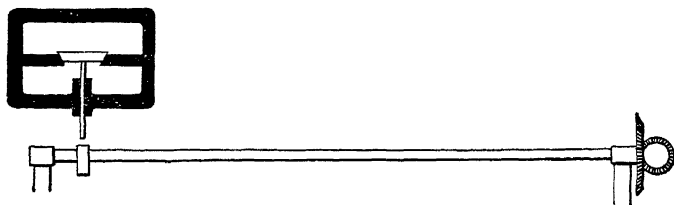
VALVES OPERATED BY BEVEL GEARING.
